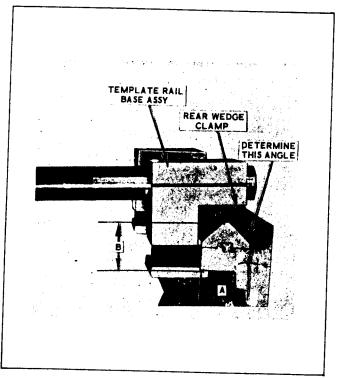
Critical Dimensions for Installing Universal Template Rail Assembly #43570 and #43585. (Used with Later Mark 11A thru VI Series)
